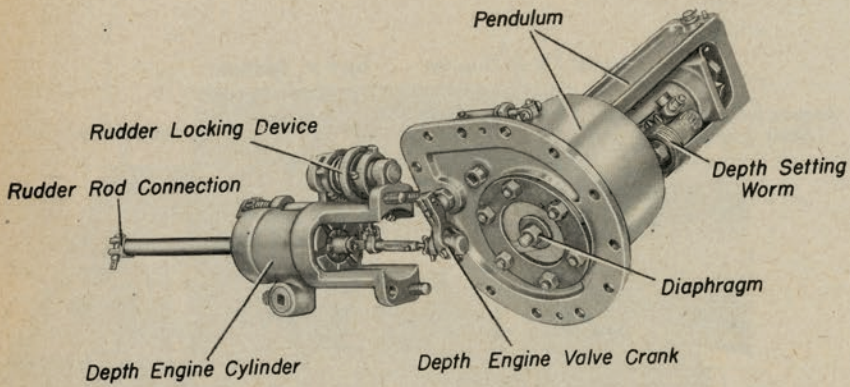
Torpedo Type 91 Mod 3, Depth Mechanism
